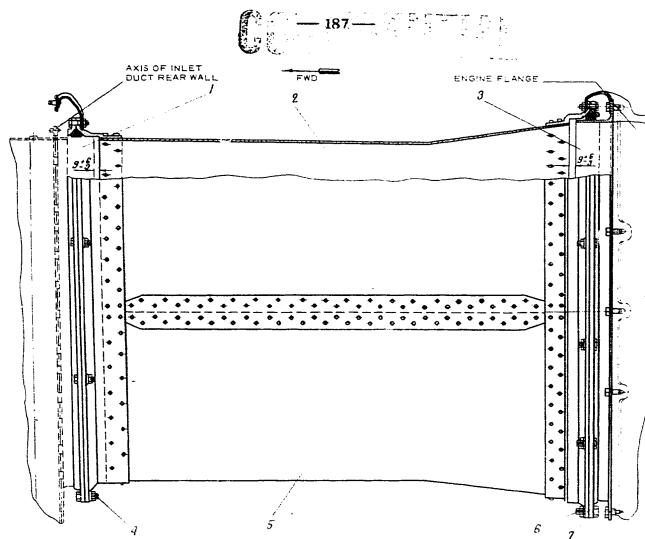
INSTALLATION OF ADAPTER TUBE BETWEEN ENGINE AND INLET DUCT
